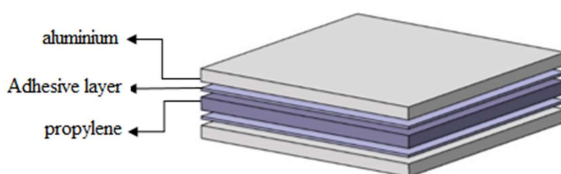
Sheet laying of metal-polymer three-layer sheet [32].
